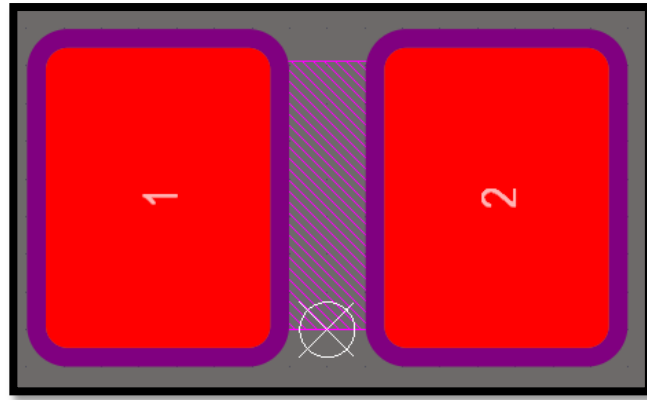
The PCB Footprint for the 0402 Package Resistors in the Library
